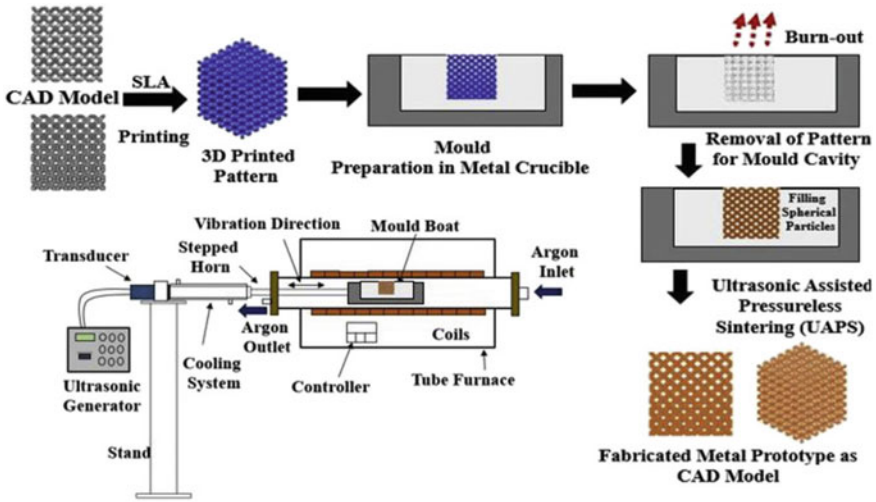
Combination of ultrasonic-assisted pressureless sintering and 3D printing as a rapid manufacturing technique. *Courtesy Singh and Pandey (2019a)
